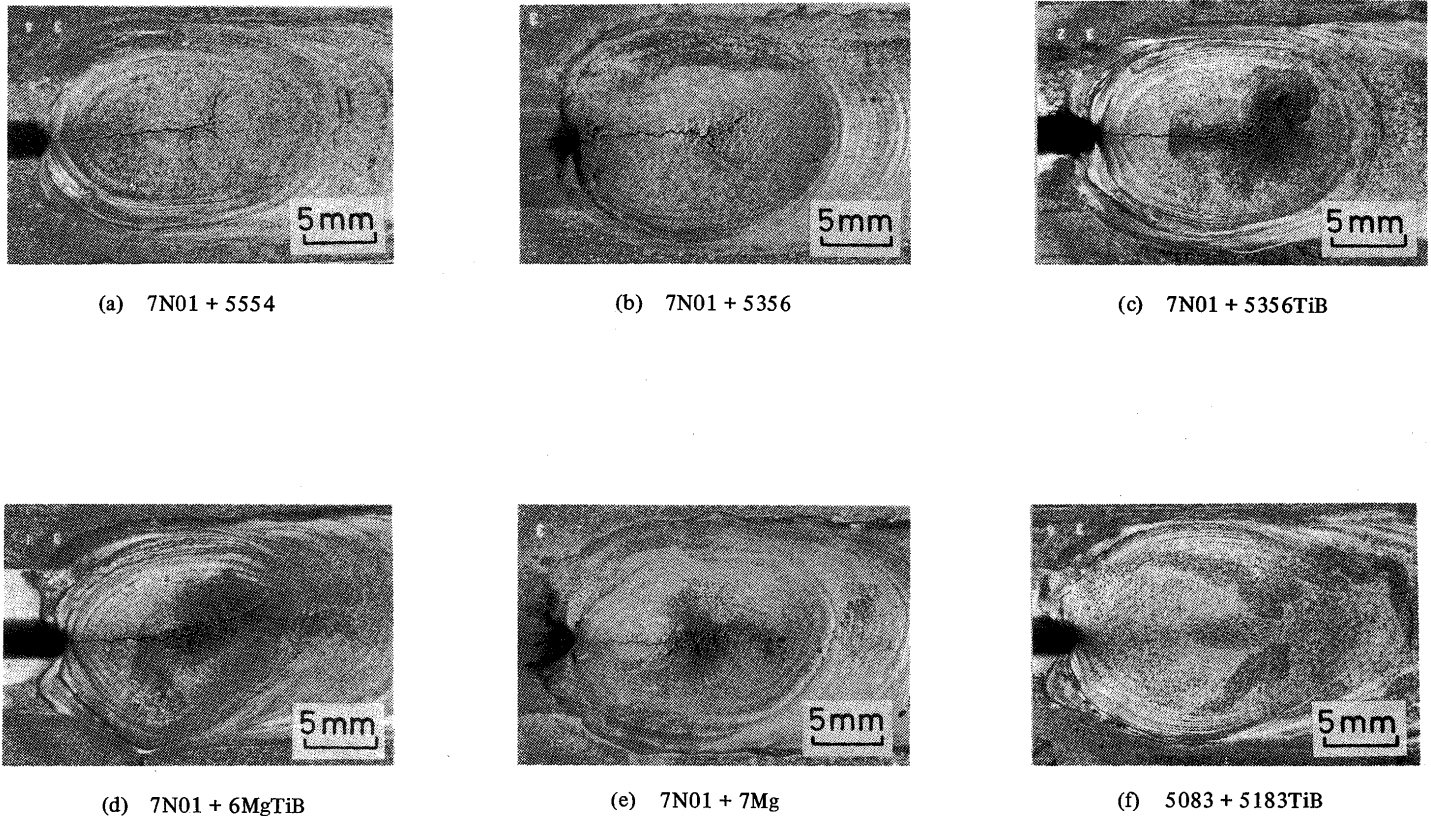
Appearance of cracking in weld crater at the welding condition of 270A and 400 mm/min.
